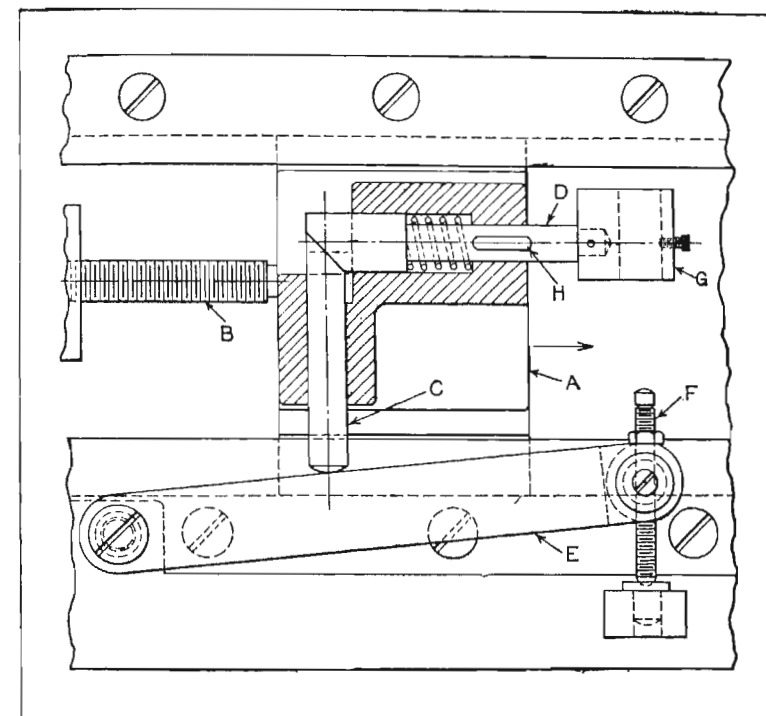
Feed for Automatic Pressing Device Used for Truing Grinding Wheel.
